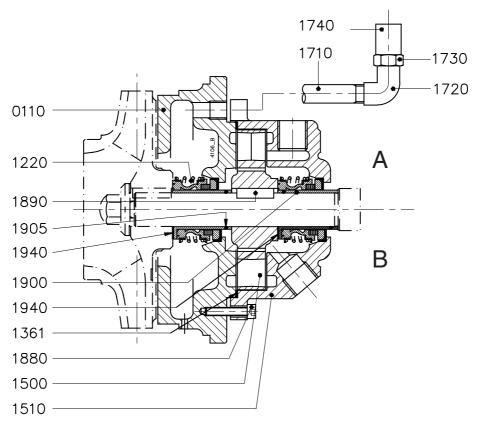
Mechanical seal M2 (A = bearing group 1 and 2, B = bearing group 3).
